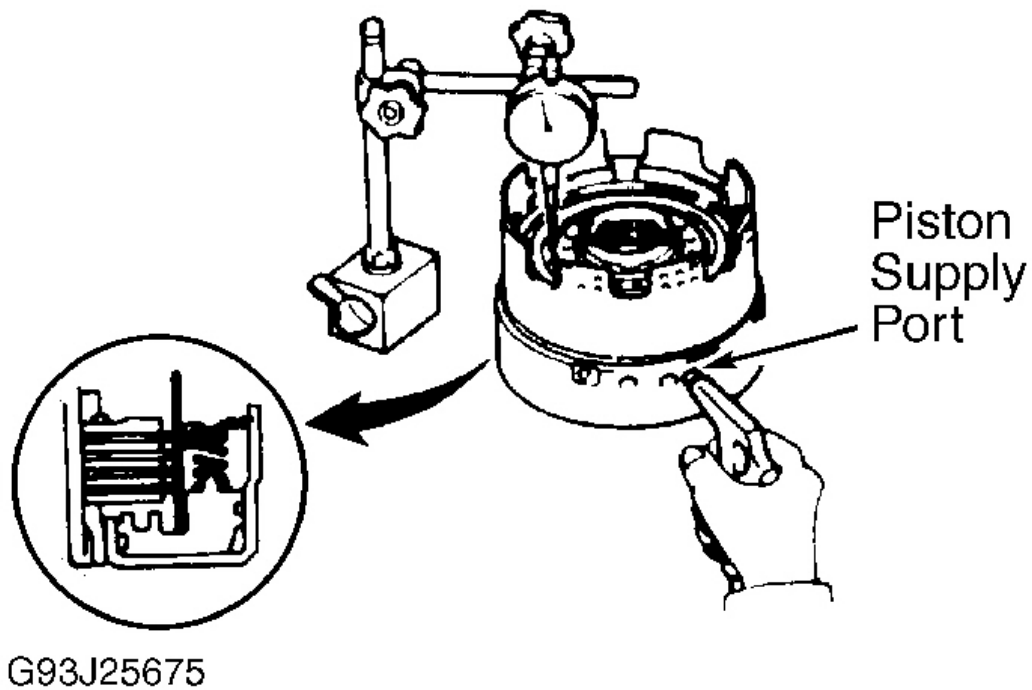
Checking Direct Clutch Piston Stroke & Installation (1 Of 2)
